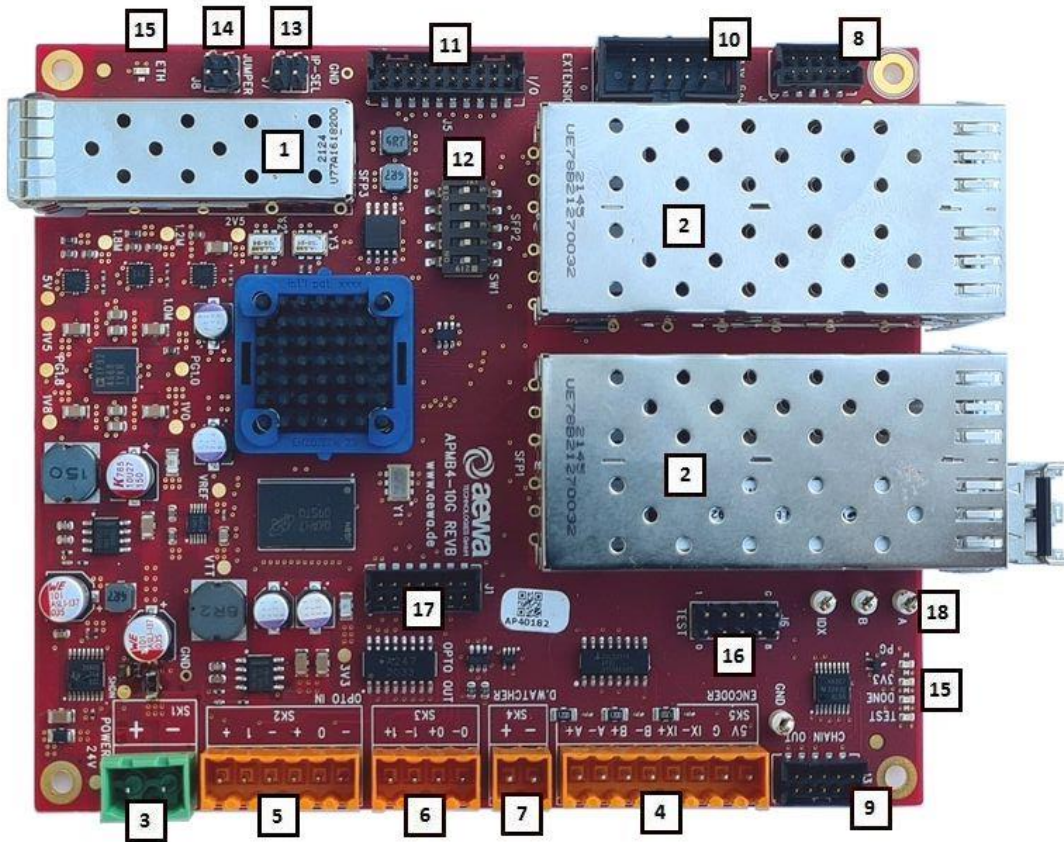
APMB4-10G BOARD COMPONENTS
